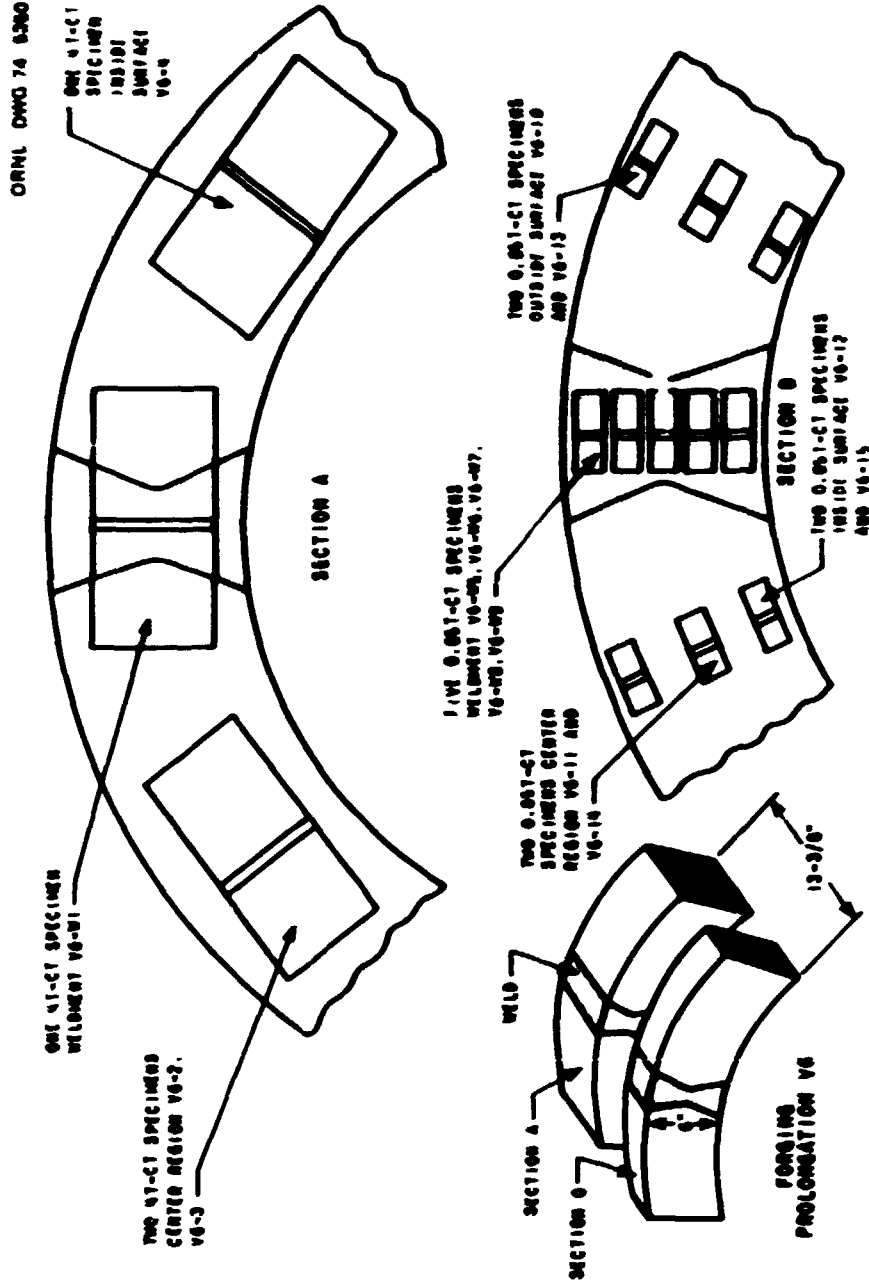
B. Machining of fracture toughness specimens from HSBRT vessel V-6 prototyping.
